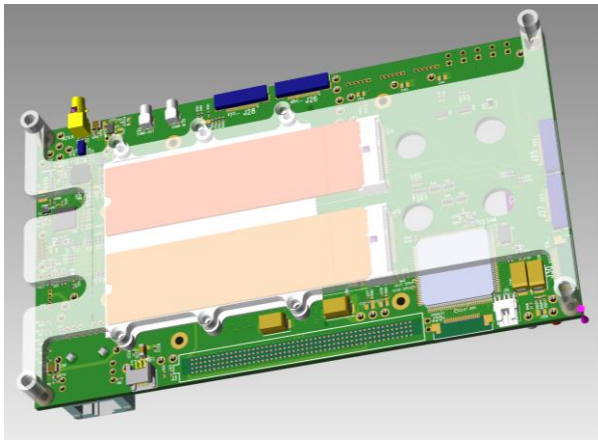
Edge Node Backplane Bottom Board, NVMe Mounting
